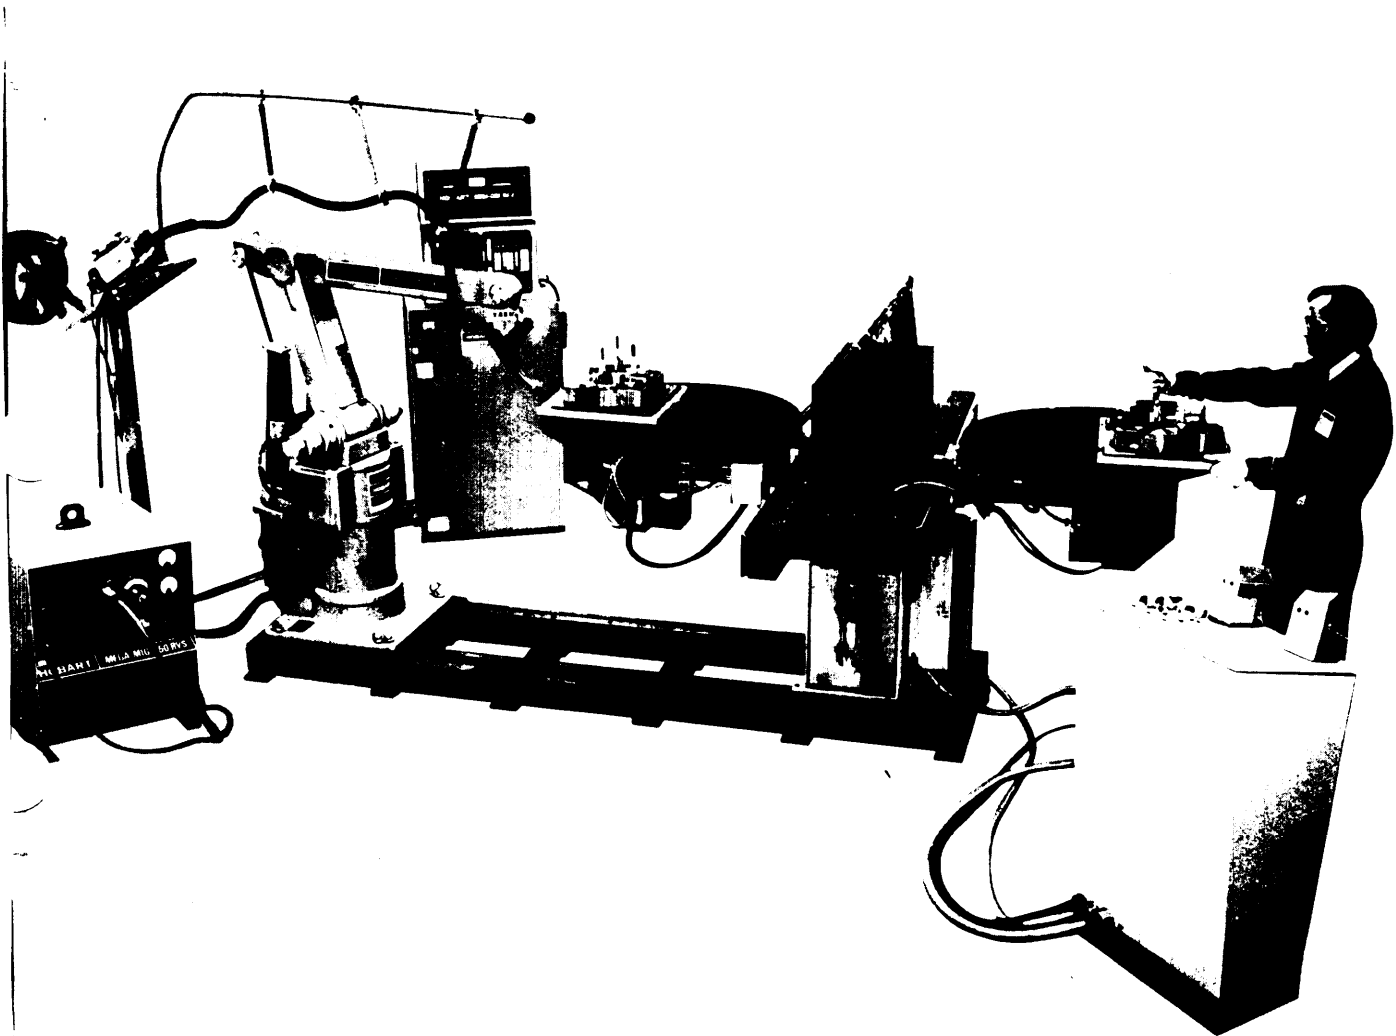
Electric arc welder, numerically controlled, featuring an articulated robot for manipulation of the welding head and a five-axis workholding and positioner capable of rotation and tilting of the workpiece. (Hobart Brothers Company)
